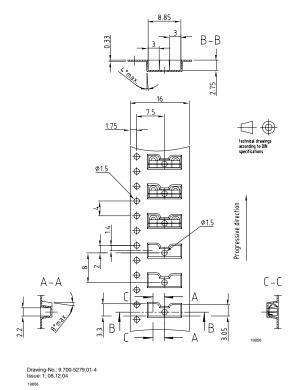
Tape for 2.5 - mm Package Side View Oriented
